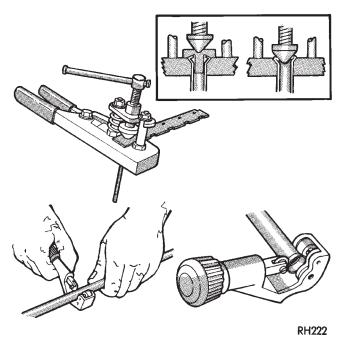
Cutting And Flaring Of Brake Fluid Tubing
